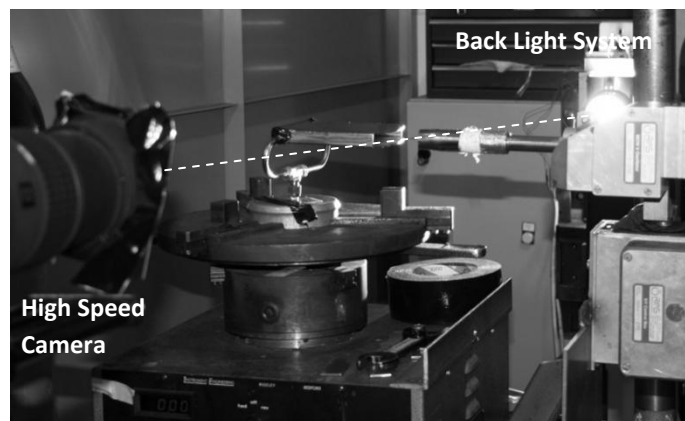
View of high speed camera and back light system aligned in opposite directions to the welding zone (pipe specimen removed)
